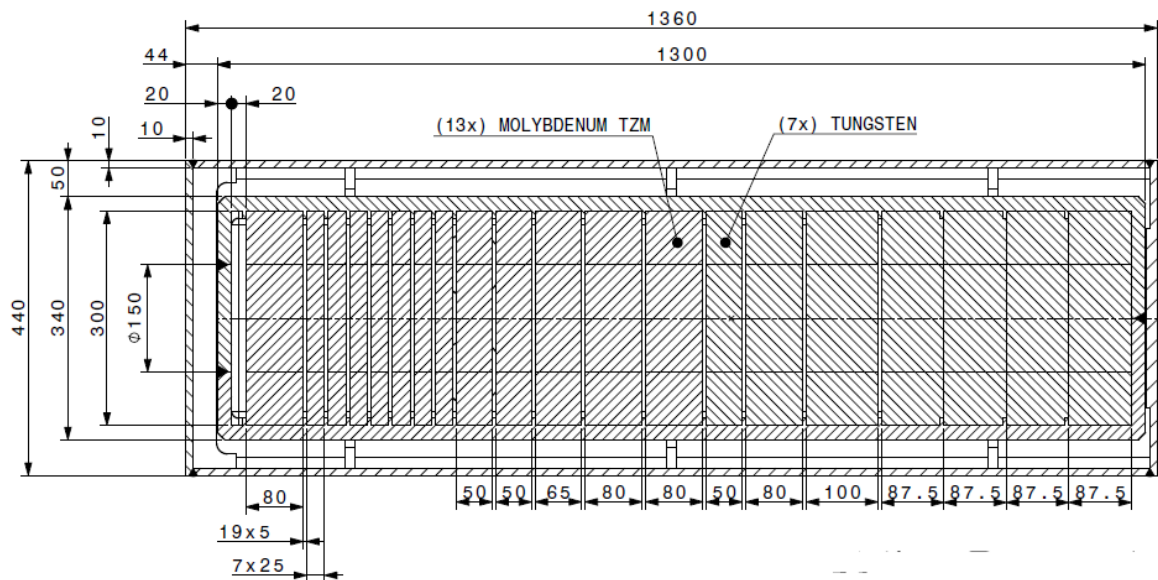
Top view of the SHiP target assembly cut at the level of the beam axis.
